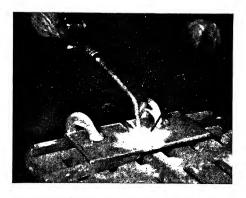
Making a practice weld in Cromansil steel plate.
